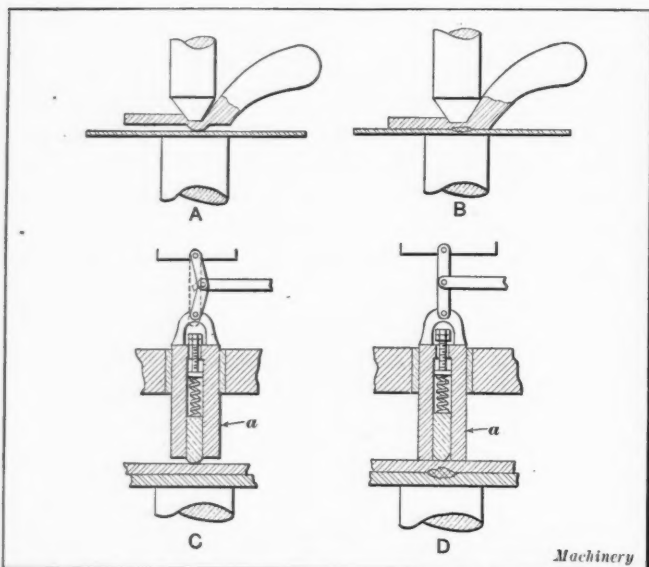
Diagram illustrating Principles of welding Thick to Thin Metal and welding Thick Sheets of Metal
